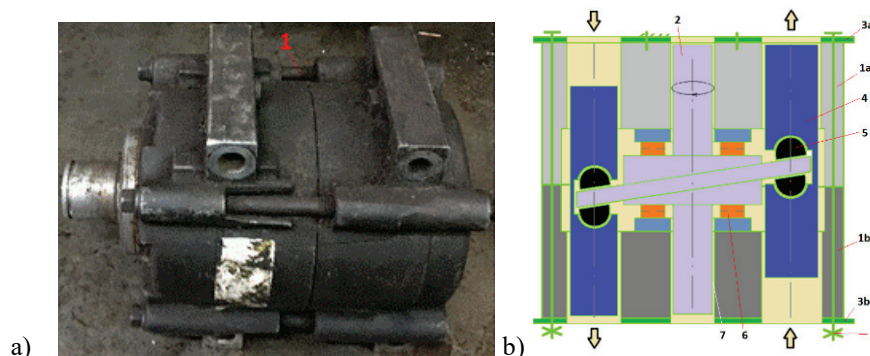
a) The axial five piston pump of cooling aggregate compressor R57166, 1 – screw, b) scheme of compressor, 1a, 1b – head components, 2 – shaft with the spatial disc cam, 3a, 3b – compressor body components, 4 – piston, 5 – tappet, 6- needle roller bearing, 7- journal sliding bearing
